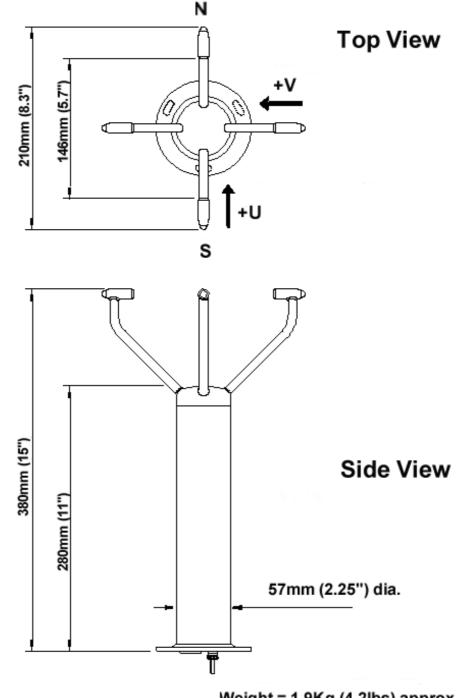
G-045 Issue 2 Anemometer Installation Details
